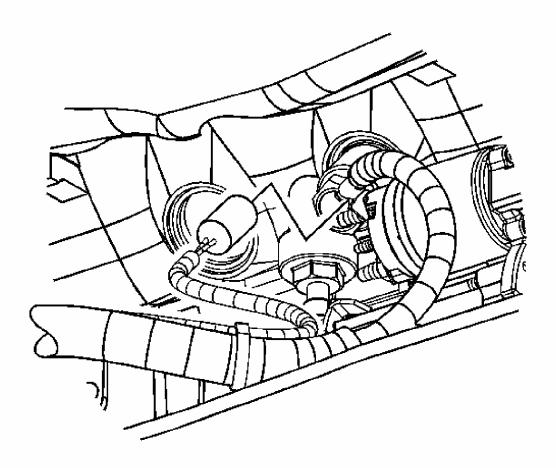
View Of Coolant Heater Cord & Connector Courtesy of GENERAL MOTORS CORP.
